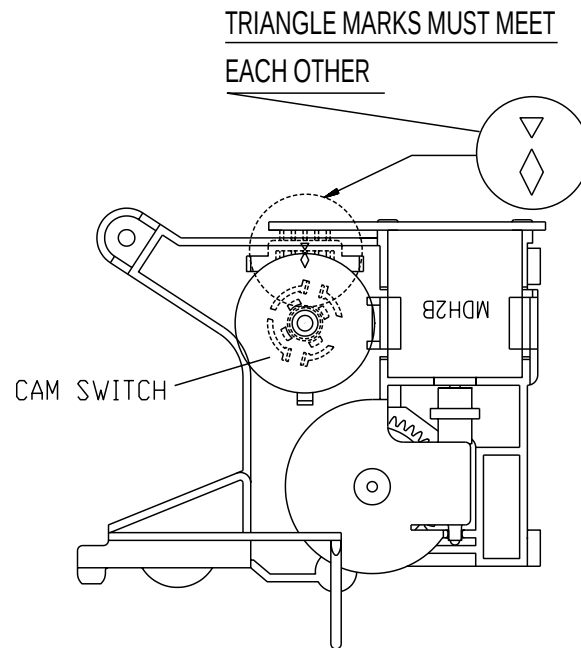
DATUM POSITION OF CAM SWITCH TRIANGULAR MARKS
